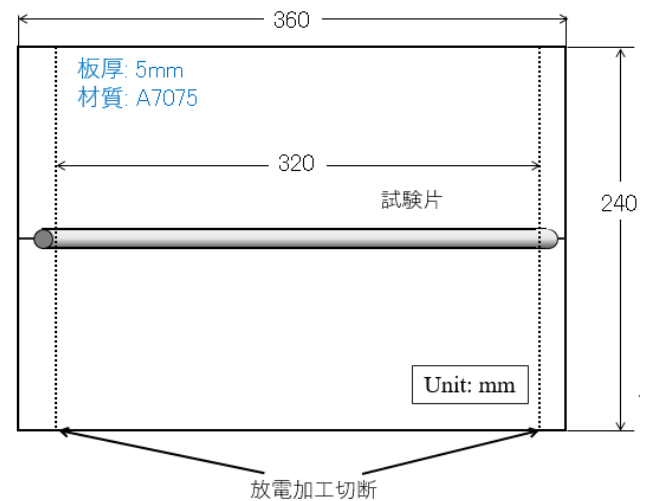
The electro discharge machining (EDM) cutting of the test piece.
